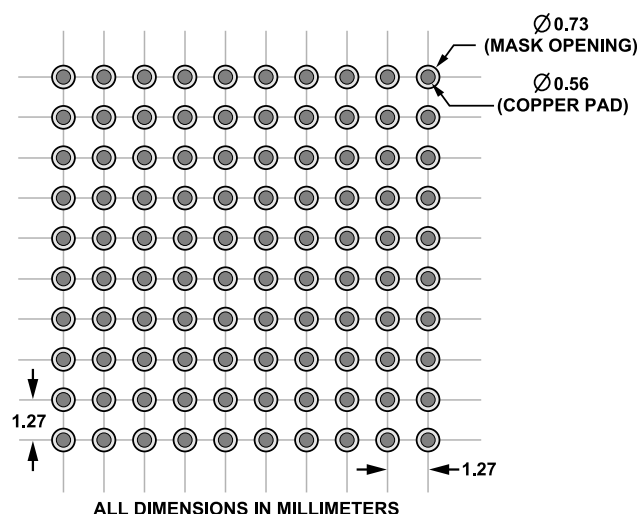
Recommended PCB Pattern, Solder Mask Defined Pads
